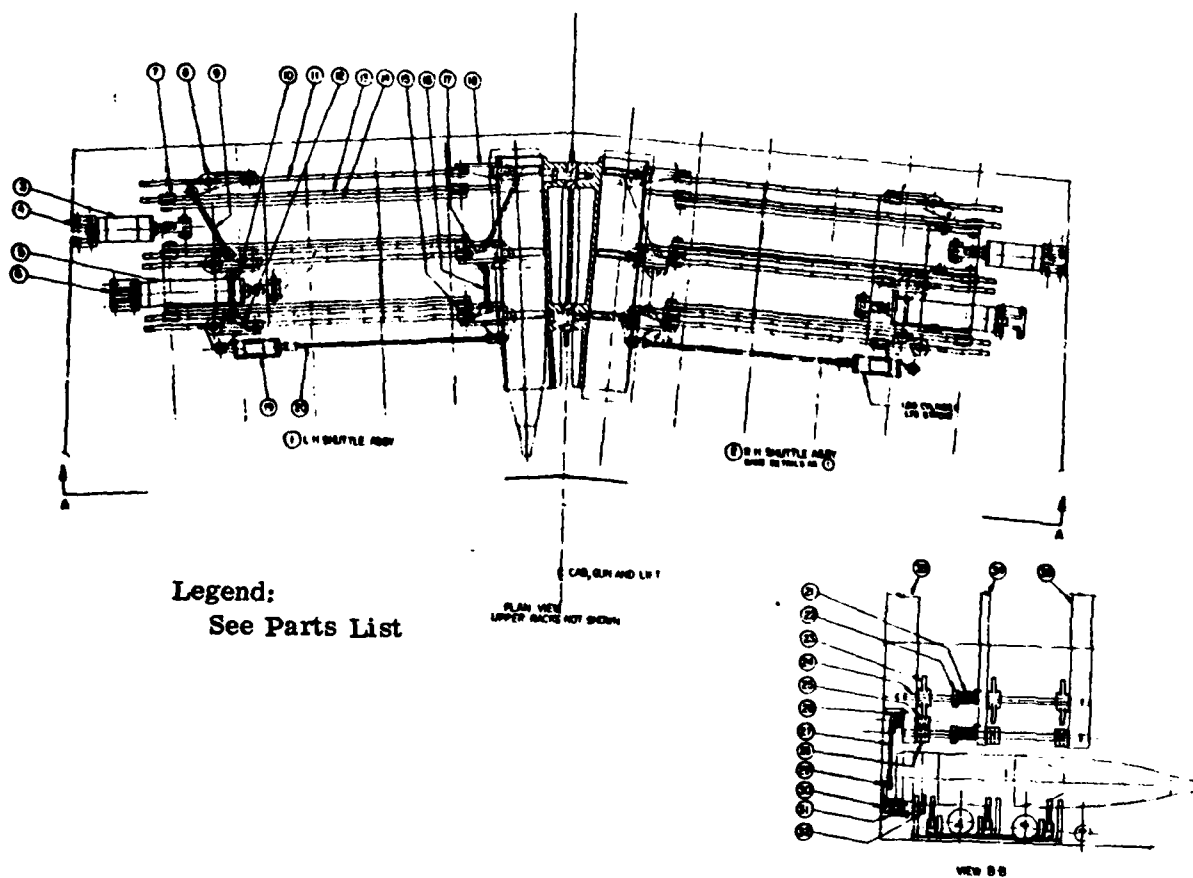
Guide Ramp Conveyor - Lateral Conveyor
